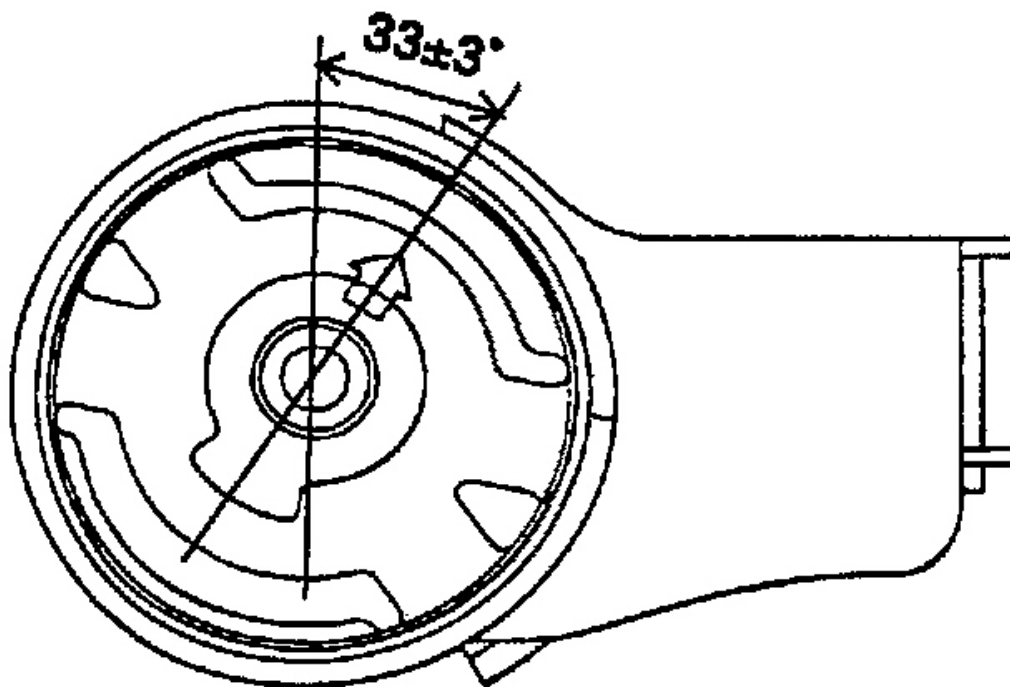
Installing Insulator In Correct Angle - Front
